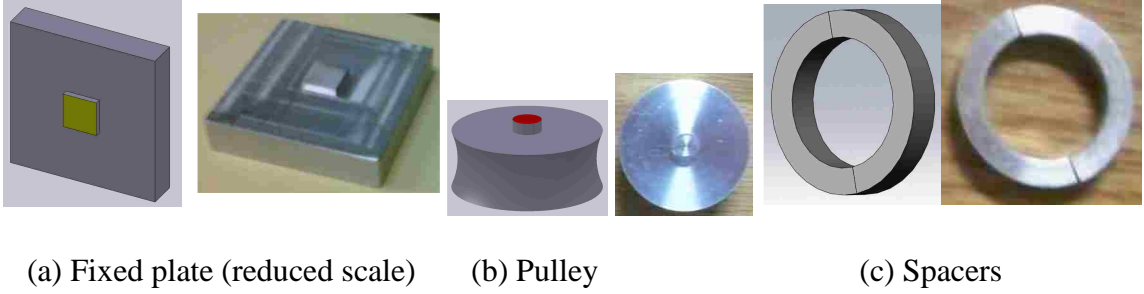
Components of a test specimen (right picture for each kind is photographed)
